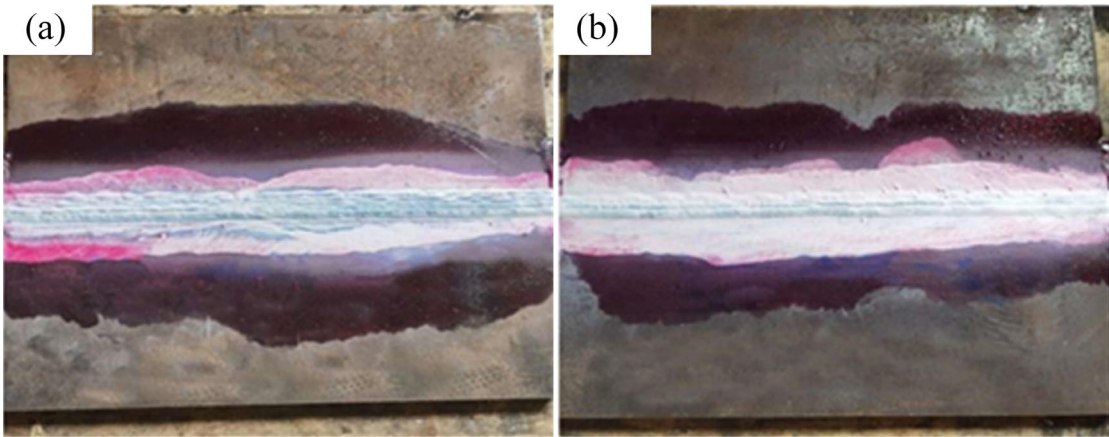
Penetrant testing results of weld: (a) TCS weld, (b) TFS weld
